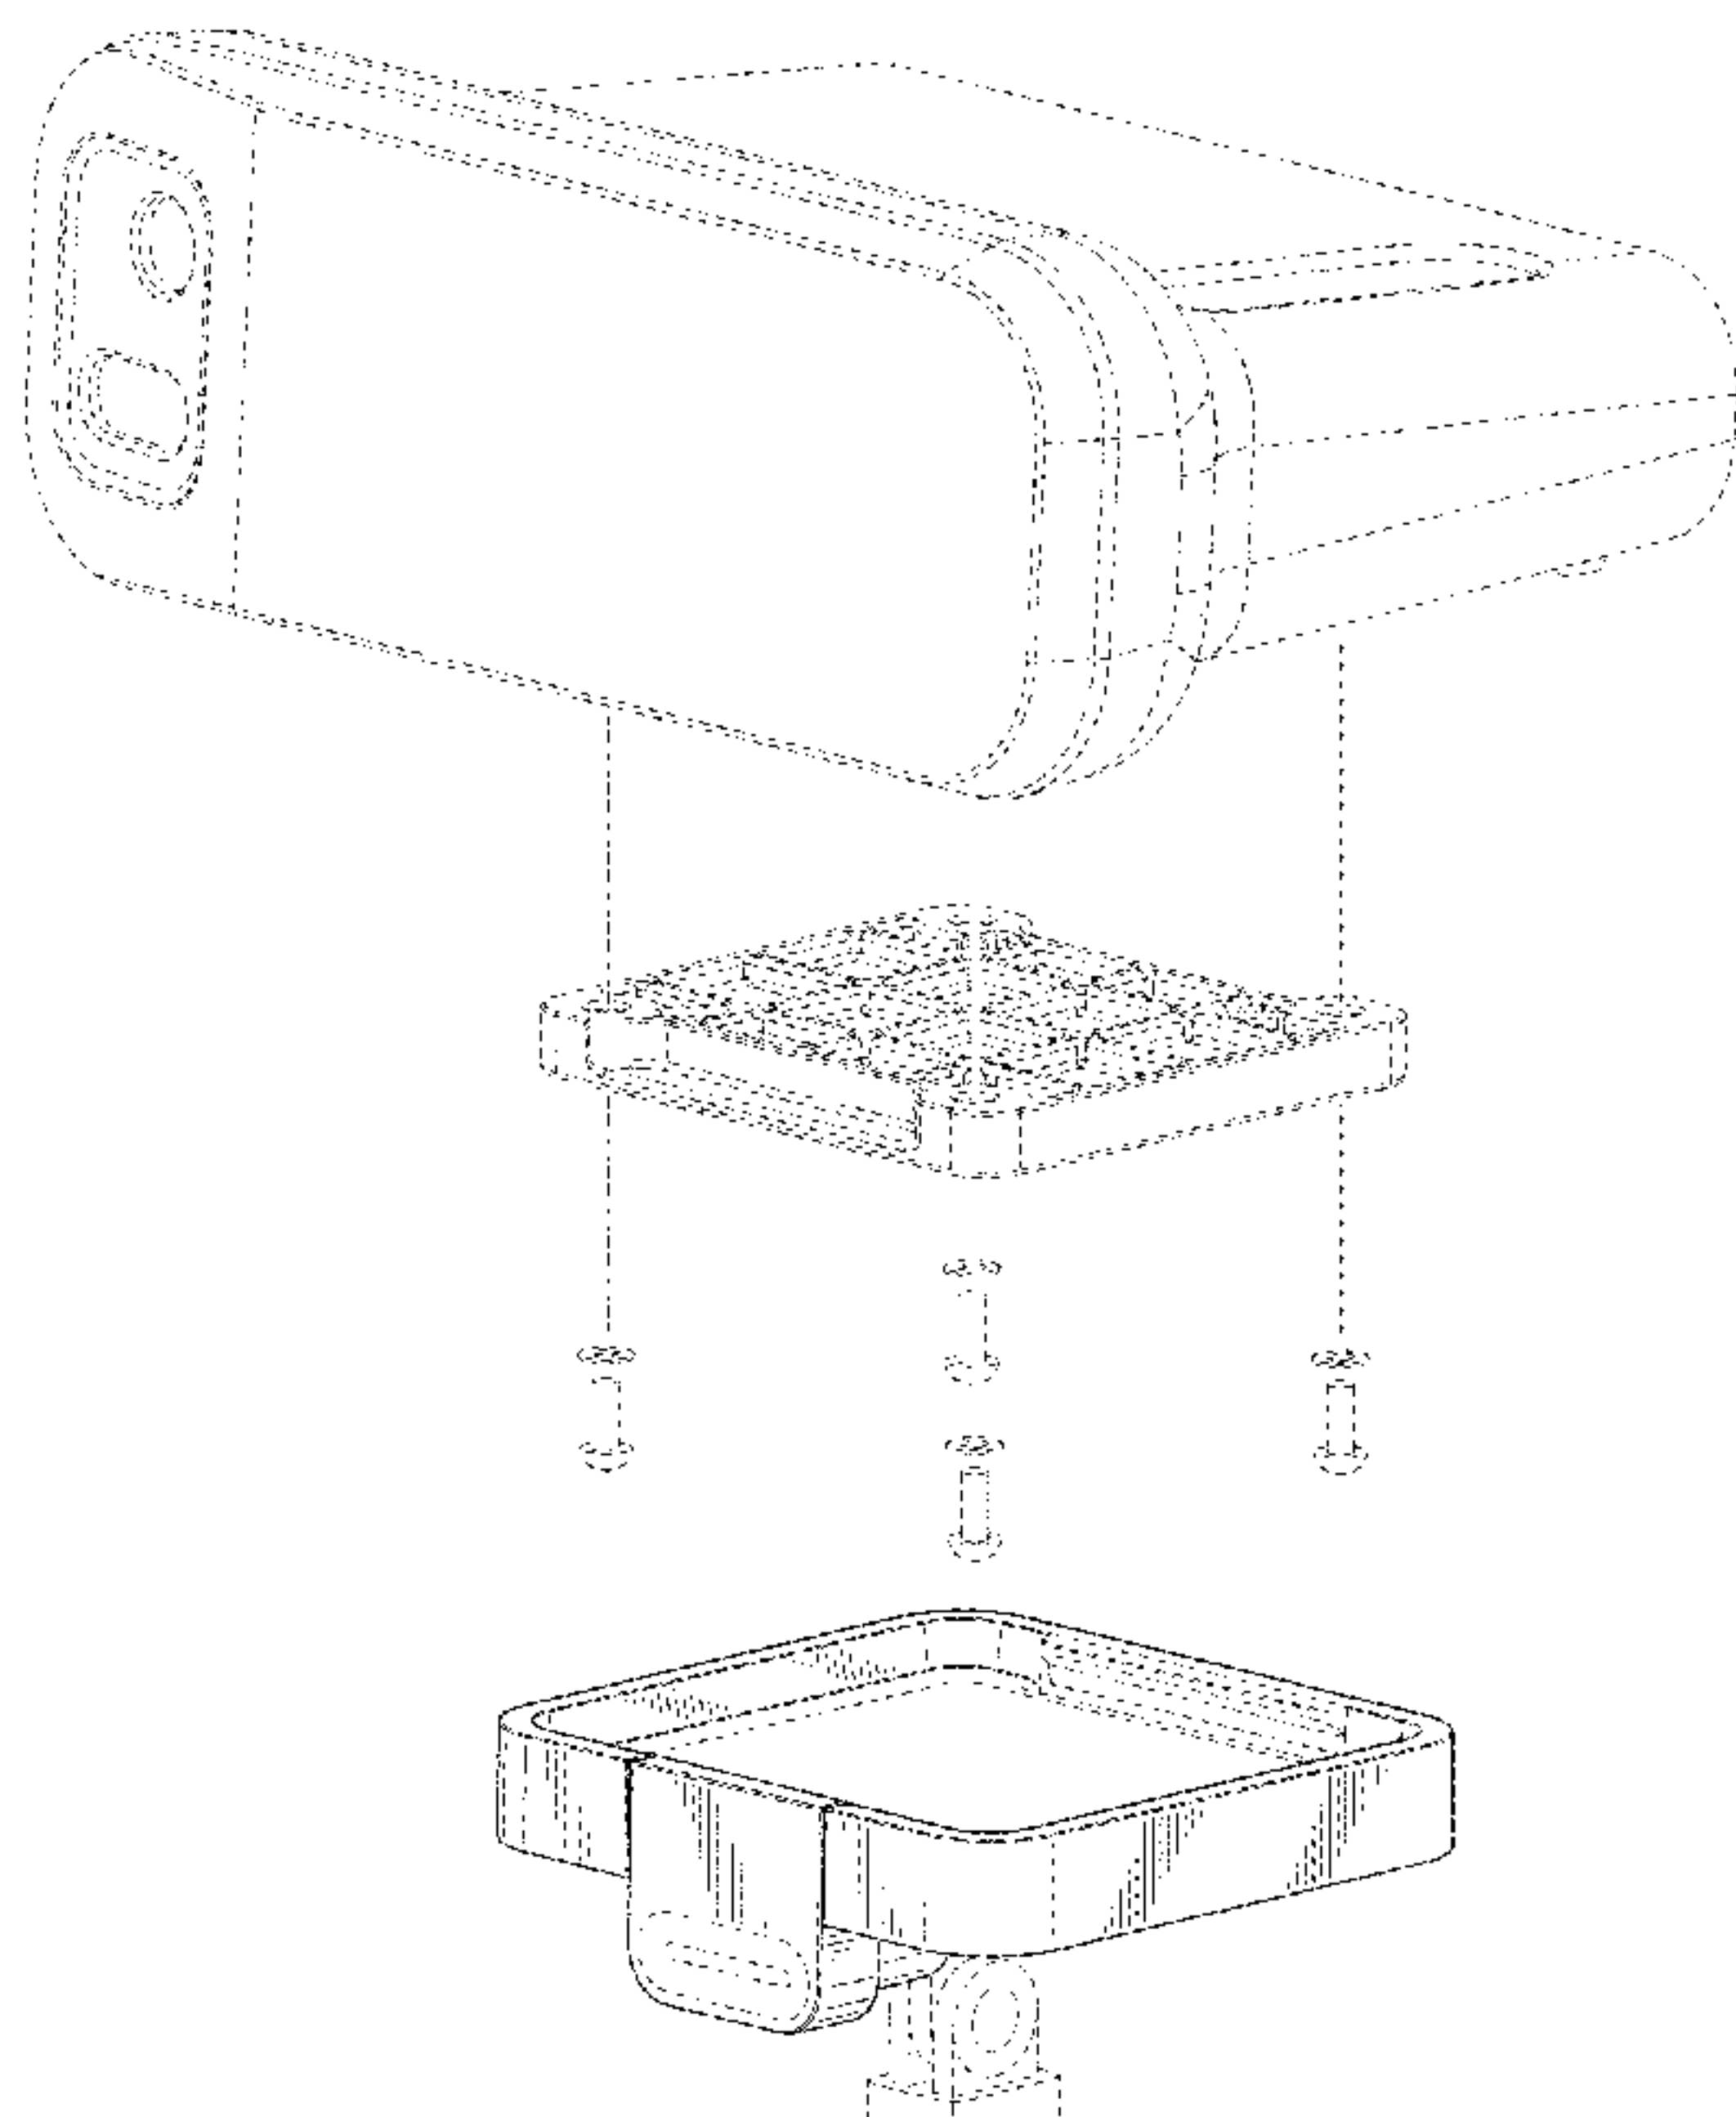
is an exploded dimetric view of a quick connect platform for retaining medical devices shown mounted in an environment, according to our new design;
